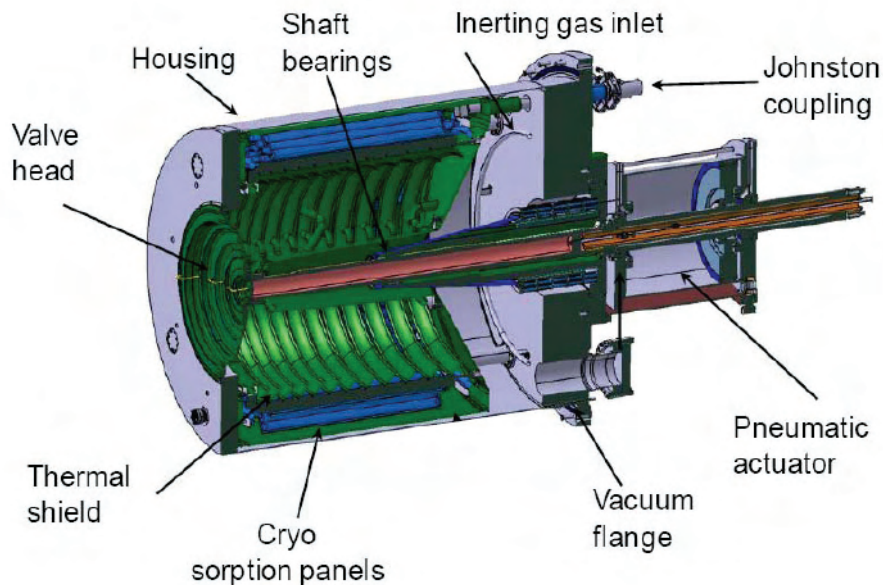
Basic design of the torus pump as single unit (Axial cut).
